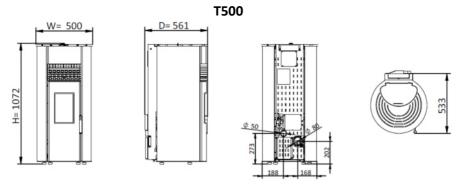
Dimensions of the free-standing pellet fire unit T500
